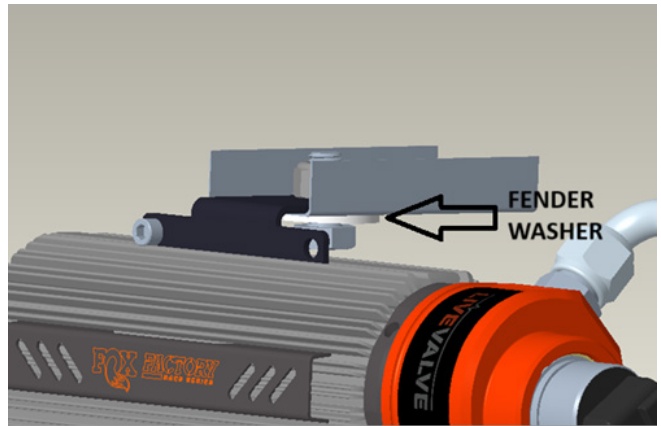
CAD model showing the nut/washer/bolt assembly in bed frame channel.
